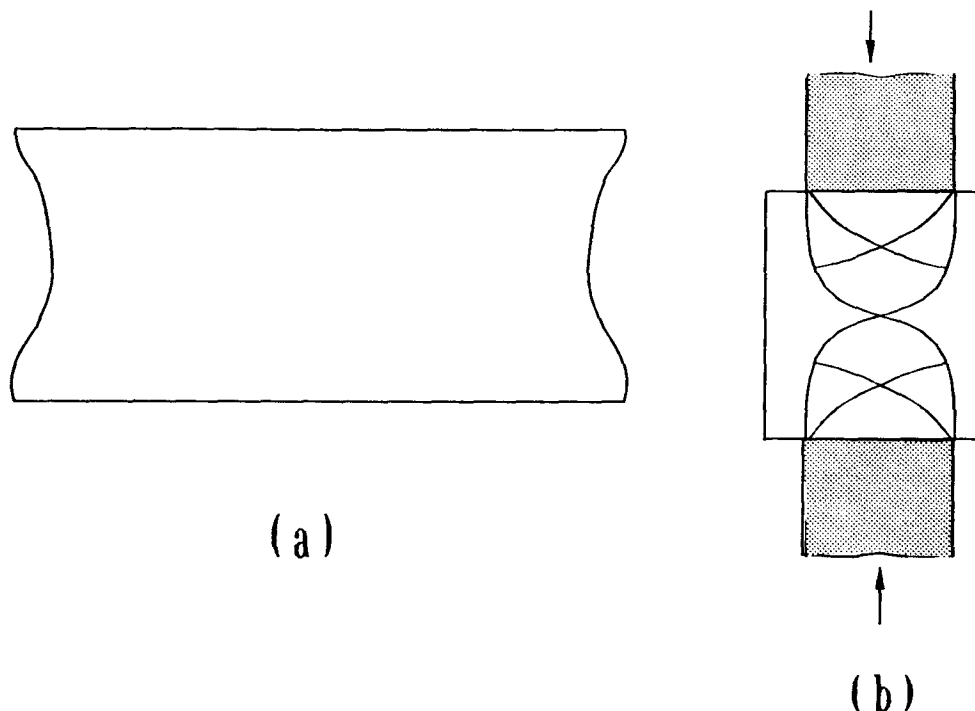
(a) The illustration of fishtail-shaped sides in ring-rolling. (b) The illustration of the slip-line field for flat-end tool forging.
